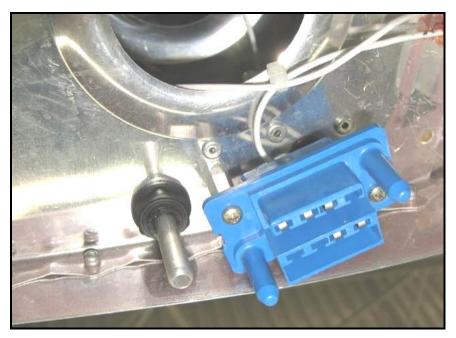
Wing FLF-00012 fitting installed with the AOA Aluminum Connector Tube fully inserted. FLF-00012 "fixed" nut end faces inboard, as shown. NOTE: The wing is shown correct side up in this photo.
